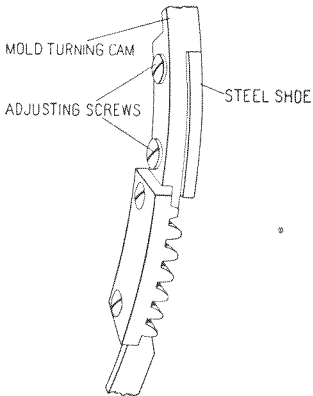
Segment of the rack which revolves the shaft turning the mold disk.
